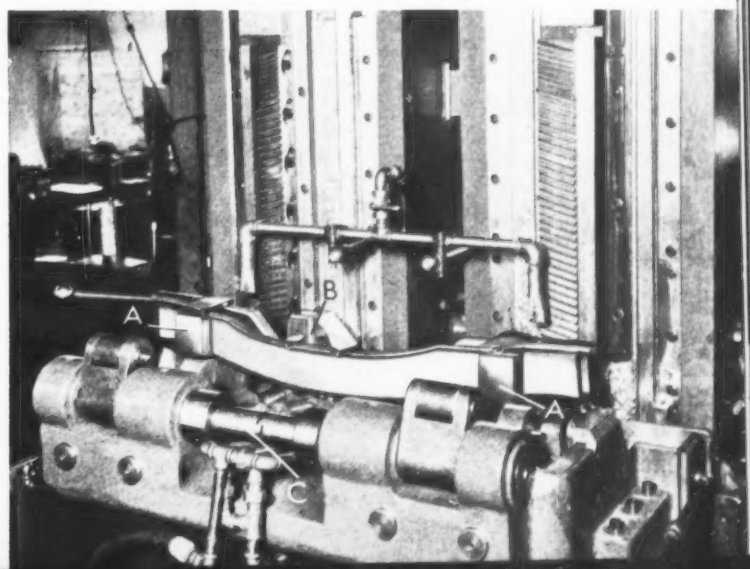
Heavy Duplex Type of Hydraulic Broaching Machine Arranged for Finishing Opposite Ends of Pressed-steel Automobile Front Axles
